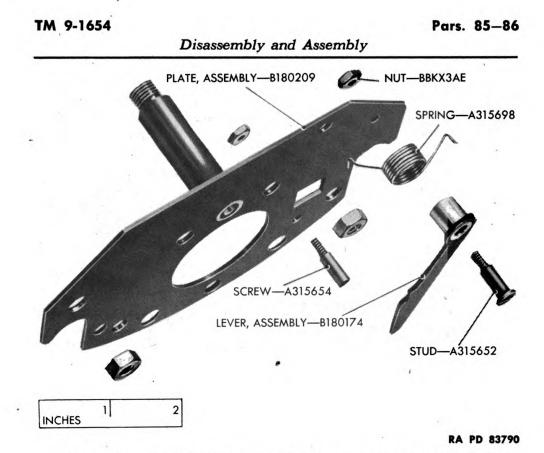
Reticle Turret Locating Lever Assembly Exploded From Carriage Mechanism Plate No. 4
